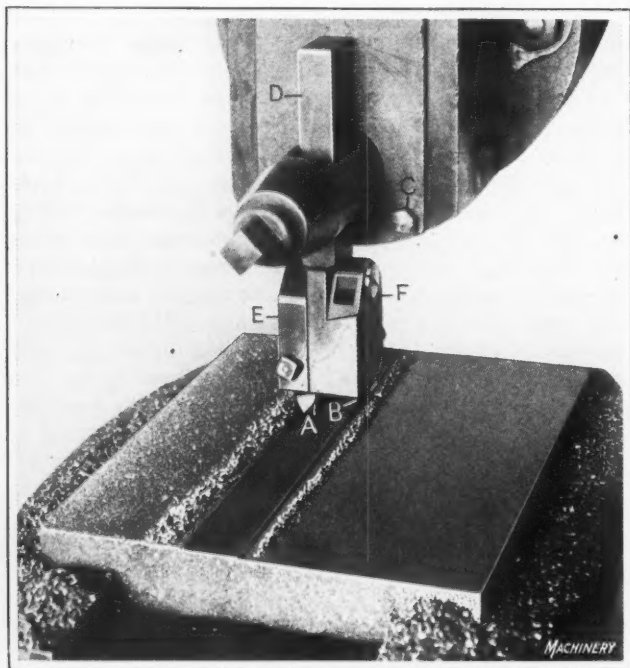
Tool-holder equipped with Cutters designed to take Roughing Cut on Forward Stroke and Finishing Cut on Return Stroke
